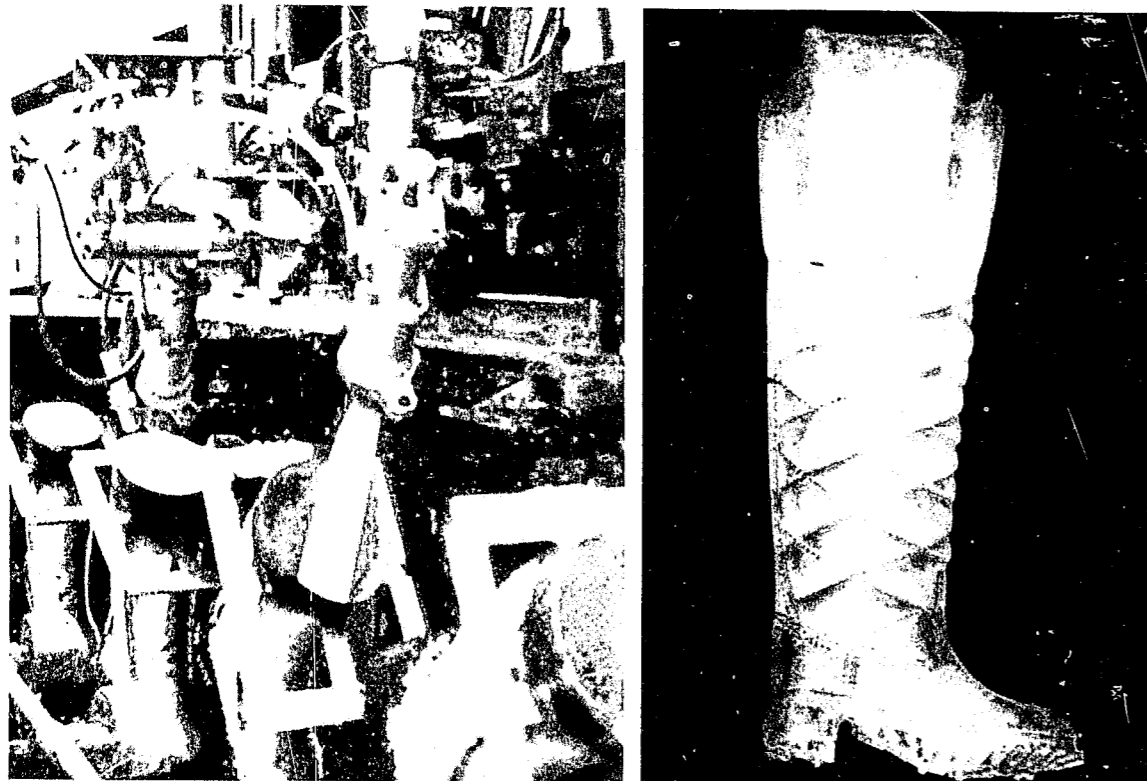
Slush molding procedure. A) Plastisol injected into mold. B) Production mold used to make hollow nickel molds. (Photos courtesy Bata Industries Limited - Footwear Division.)
